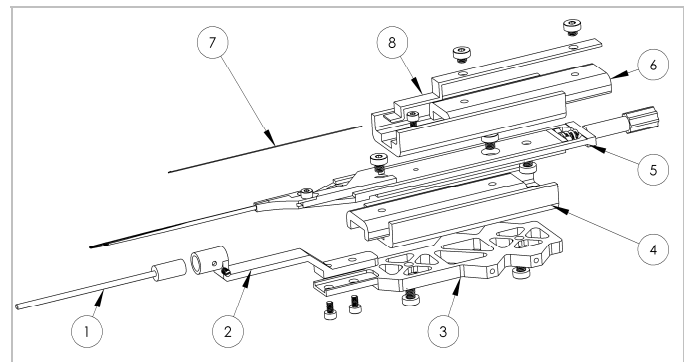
Exploded view of the Robotic Insertion Mechanism showing (1) the guide tube, (2) the front plate, (3) the base plate, (4) implant gripper actuator, (5) the implant gripper, (6) the stylet hook actuator, (7) the stylet hook, and (8) the gripper.
